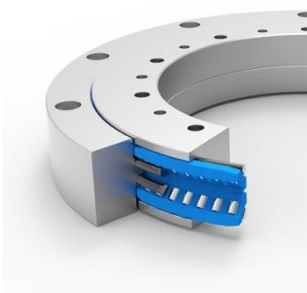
Bearing assemblies type LVG with integrated 2-row roller wire-race bearing.
